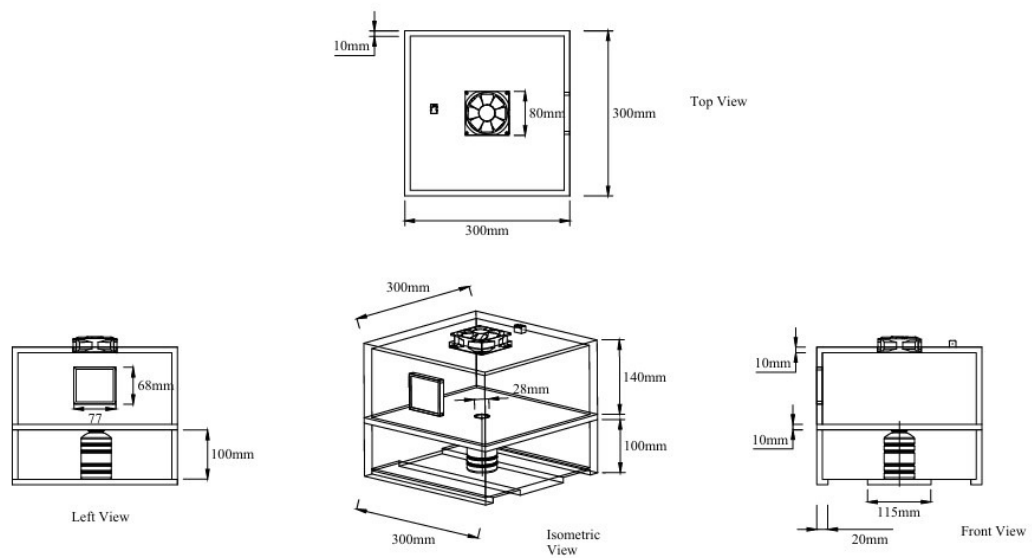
Final Solidworks to AutoCad Drawing with Dimensions.
